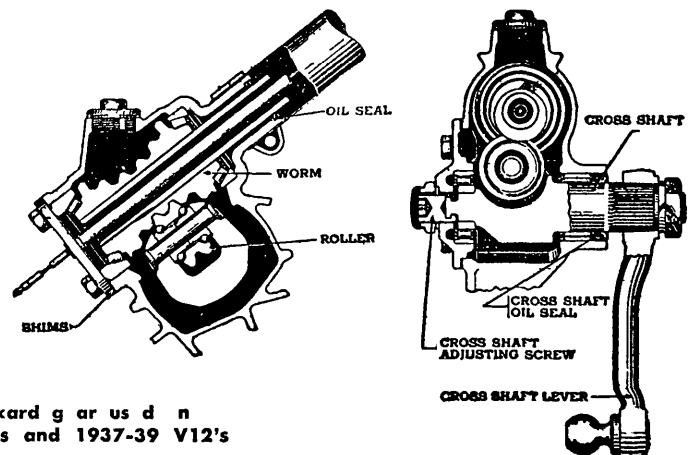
Packard gear used on 1937-38 Super 8's and 1937-39 V12's
